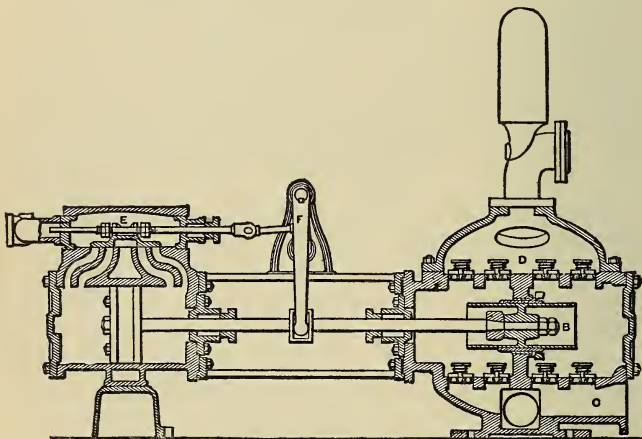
Duplex pump with inside packed plungers. In construction, two steam pumps are placed side by side and so combined that one piston acts to give steam to the other, after which it finishes its own stroke and waits for its valve to be acted upon by the other pump before it can renew its position. This pause allows the water valves to seat quickly, and removes any harshness of motion. As one or the other of the steam valves is always open, there is no dead point, and therefore the pump is always ready to start when the steam is admitted.
